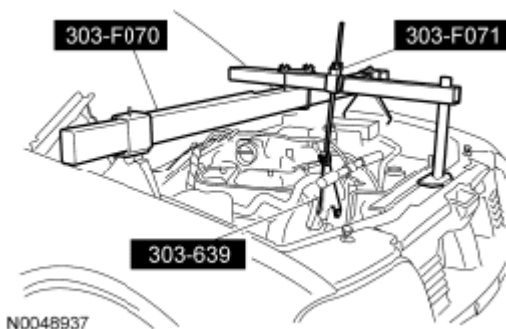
Installing Engine Support Bar, Support Hook And Engine Support Bracket
